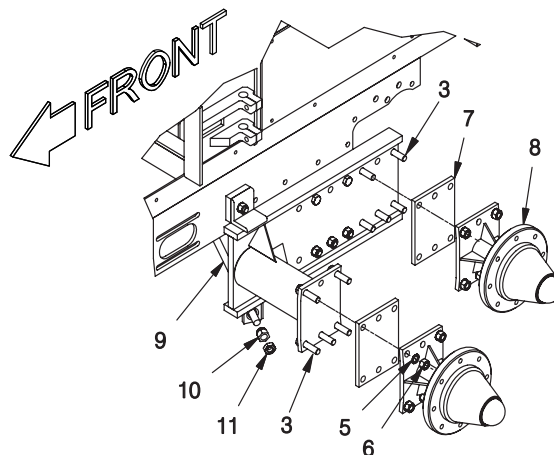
Mounting Spacer Plates, Hubs & Truss Rod
